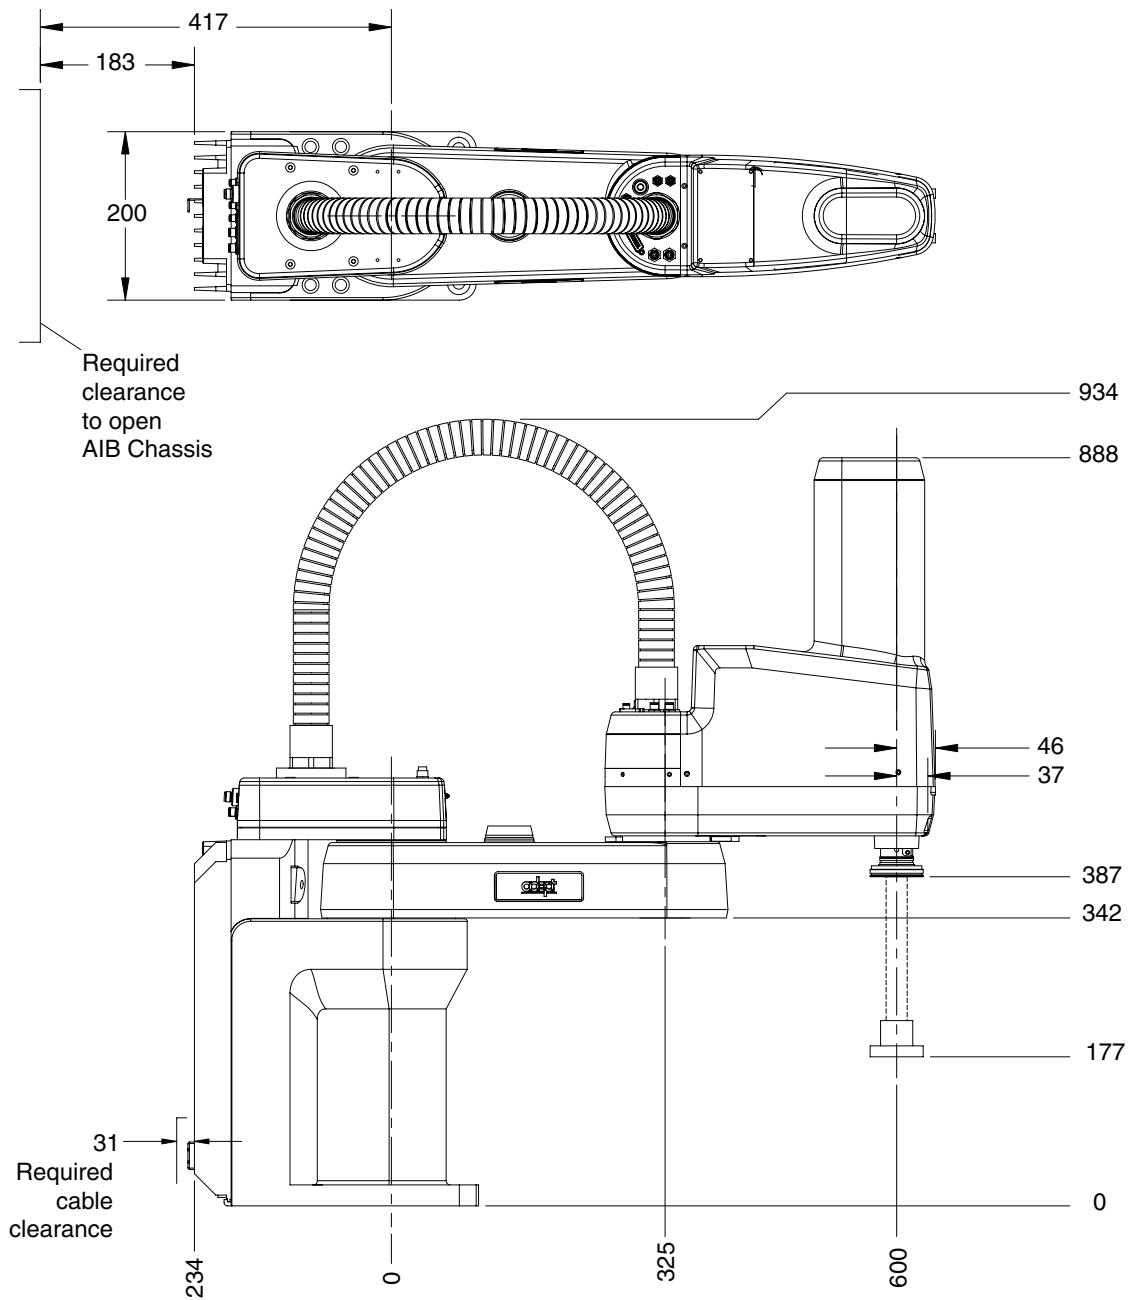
Adept Cobra s600 Robot Top and Side Dimensions
